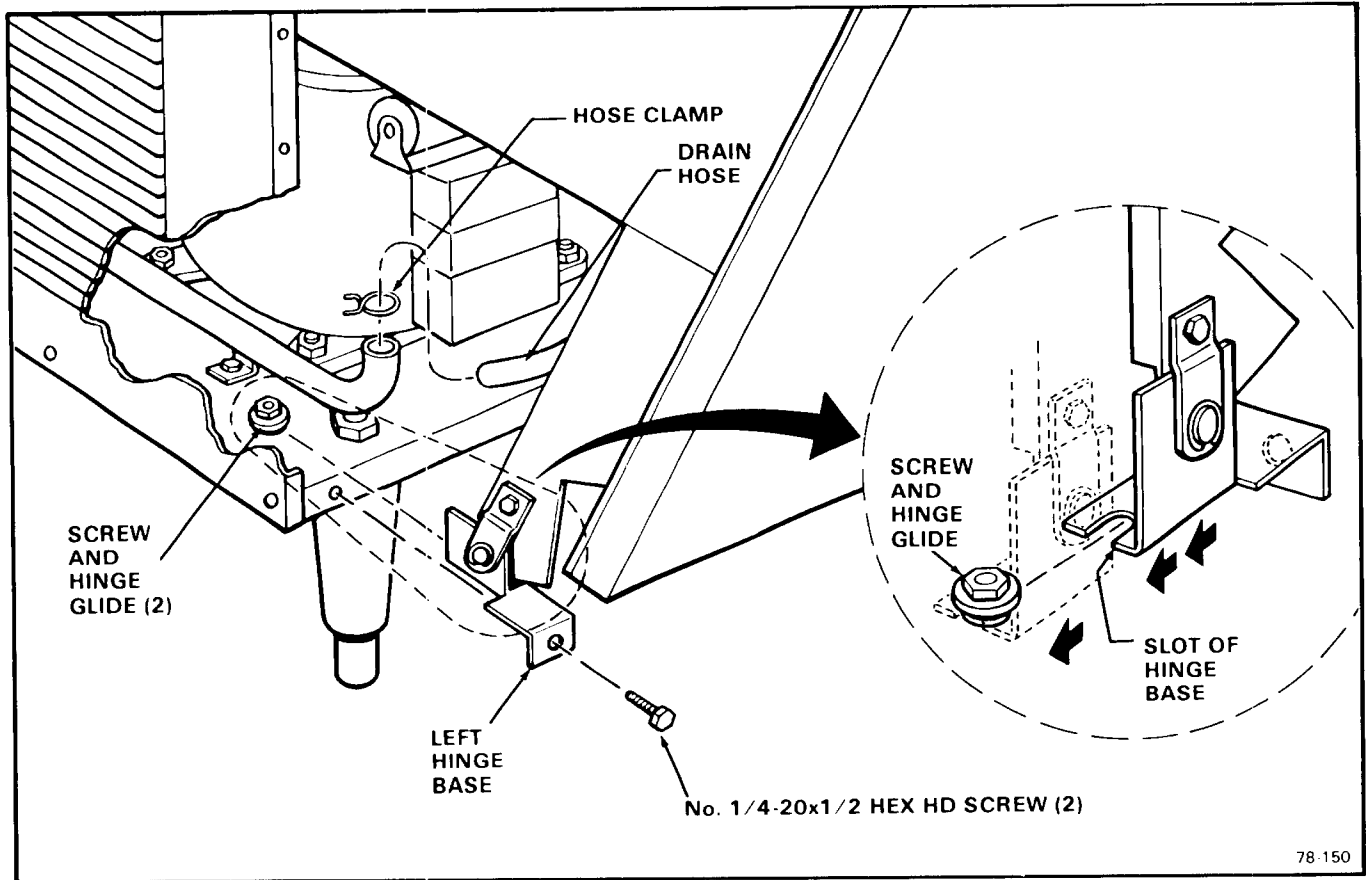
Removal of the Lower Front Door Bin Assembly
